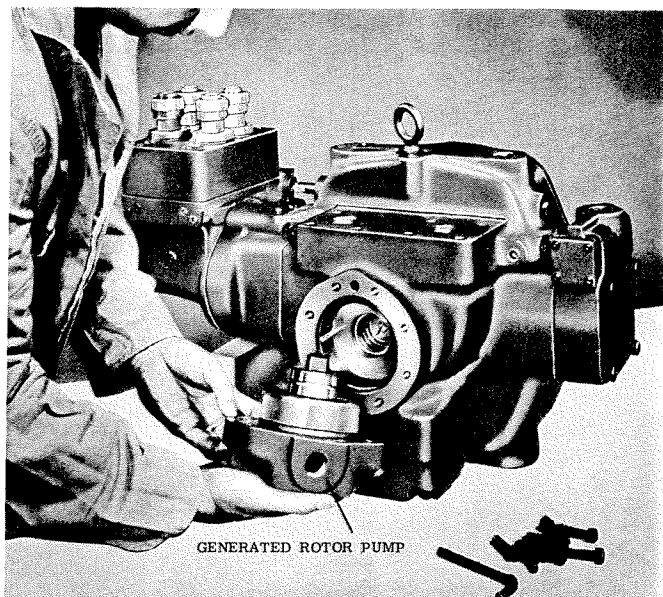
Replacing Generated Rotor Pump Housing Assembly (54586).
